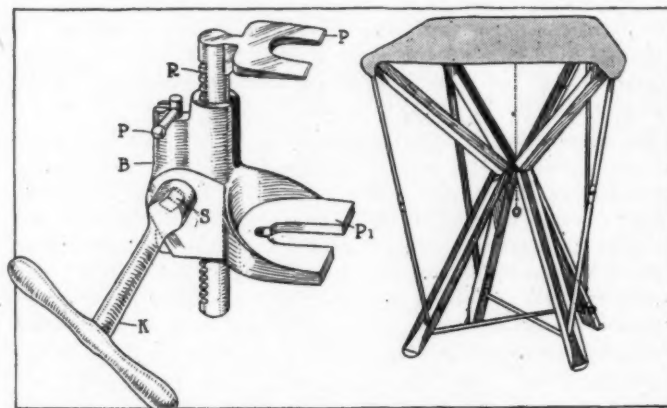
Bryant valve spring remover. Fig. 3—Glendale folding chair
